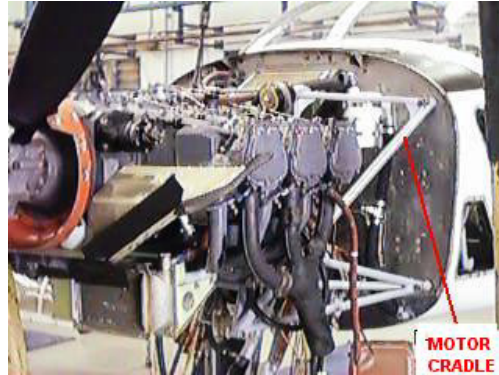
Motor-cradle assembly in a T-25 Universal Brazilian aircraft.
